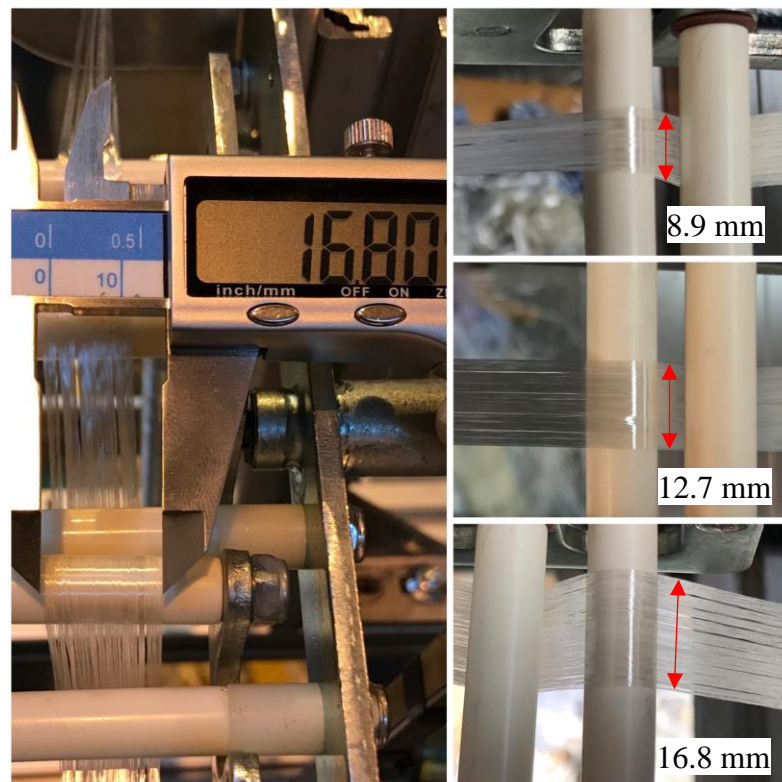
Examples of spreading S2-glass fibre bundle using the fibre spreader assembly.
